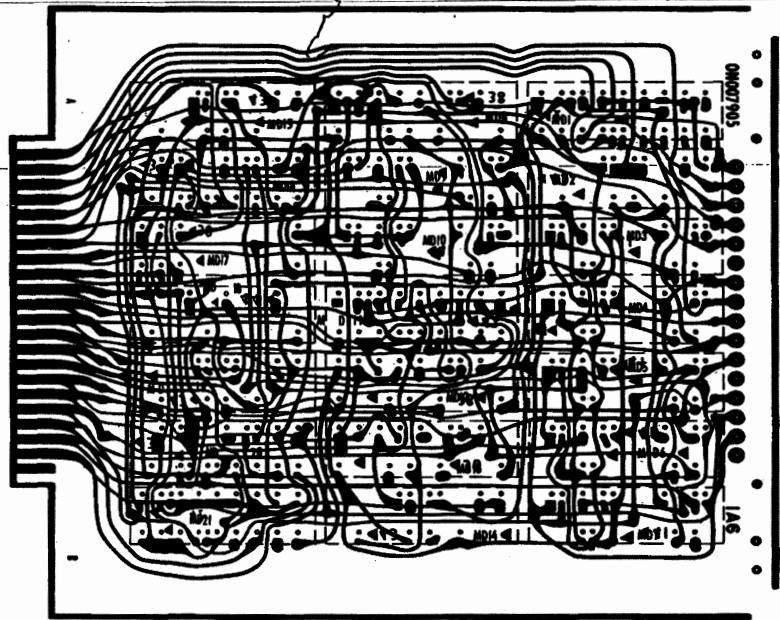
Card E-AJN Printed-Circuit Layout.
